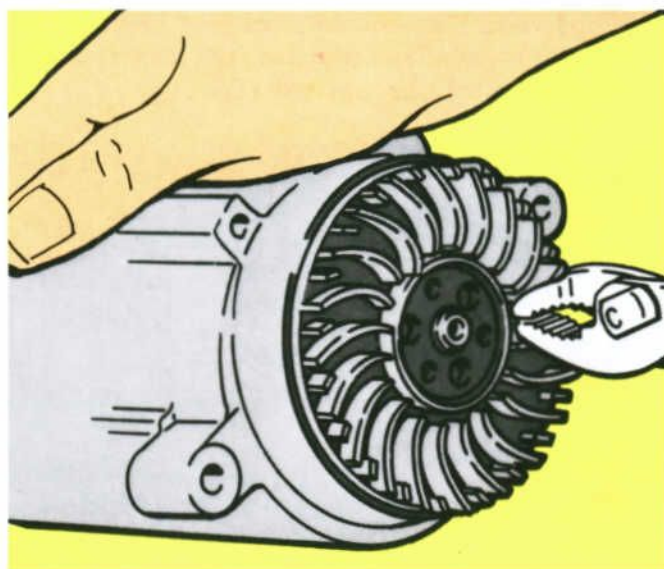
CENTRIFUGAL FILTER FAN REMOVAL
